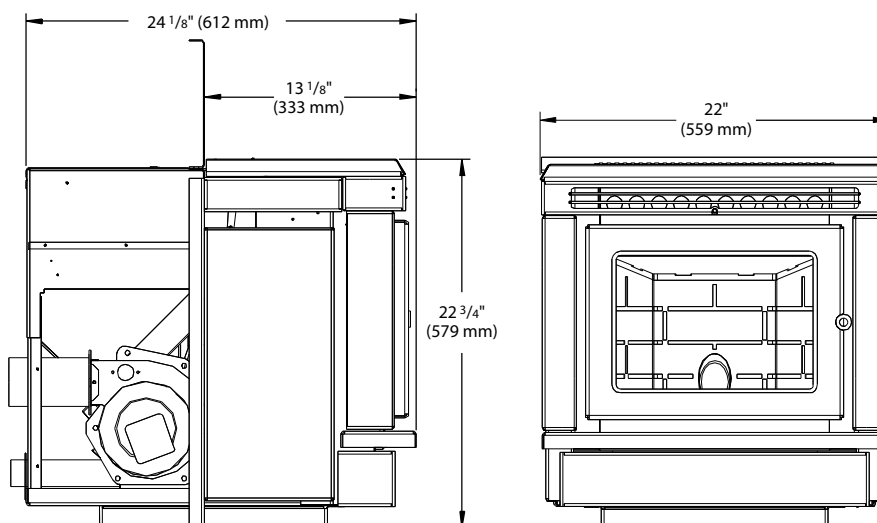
EF2-1 Fireplace Insert Dimensions.
